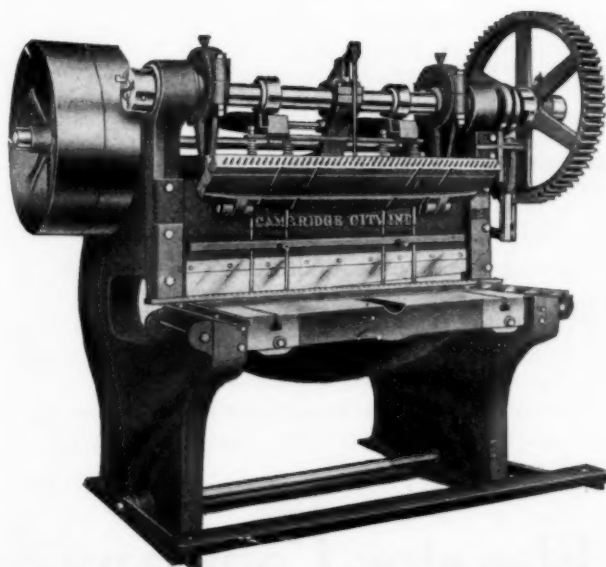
shows the punch-cross-head disengaged, thus converting the machine into a regular shear for shearing only.
